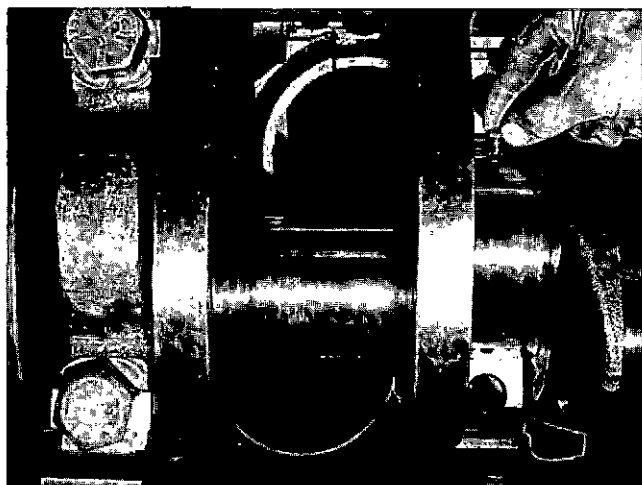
, V414110. Installing pin for turning out main bearing shell
